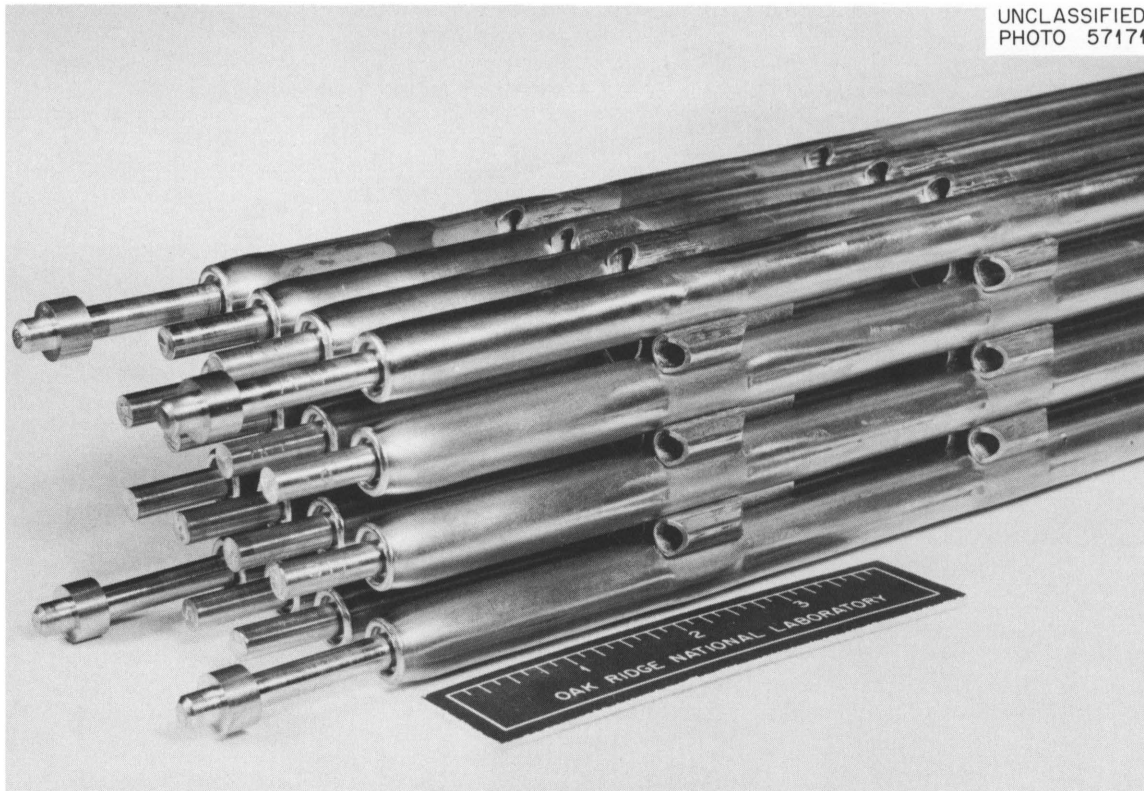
As-Brazed Assembly Showing Swelling of Individual Fuel Tubes.
